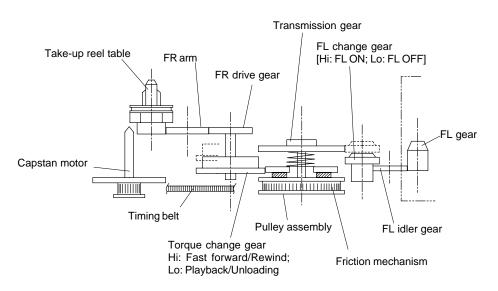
Mechanism that Drives Reel Tables and FL Mechanism (Side View)
